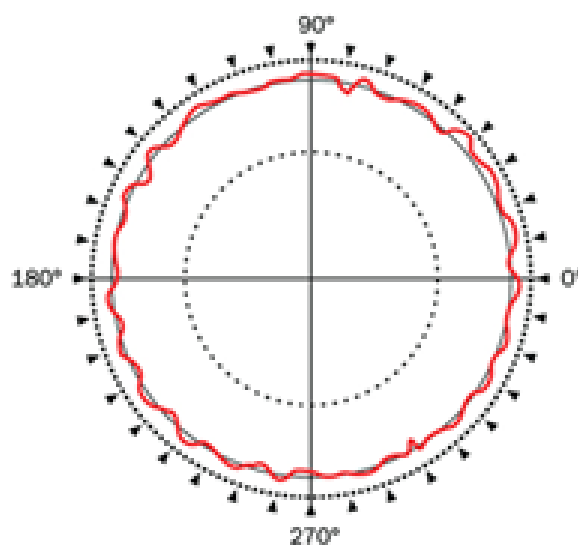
Circular pattern of a hole machined with CoroReamer™ 435 Sandvik Coromant reamer [3-8]
